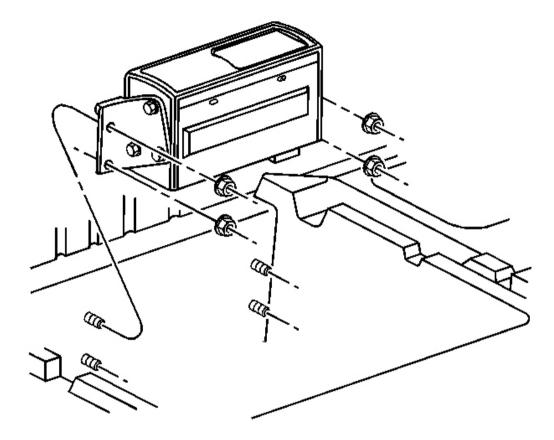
Remote CD Changer & Mounting Nuts Courtesy of GENERAL MOTORS CORP.
